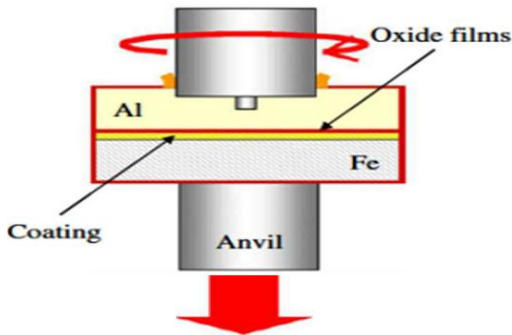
A schematic illustration of the friction stir spot welding FSSW process steps for joining Aluminum with Galvanized steel [11]
